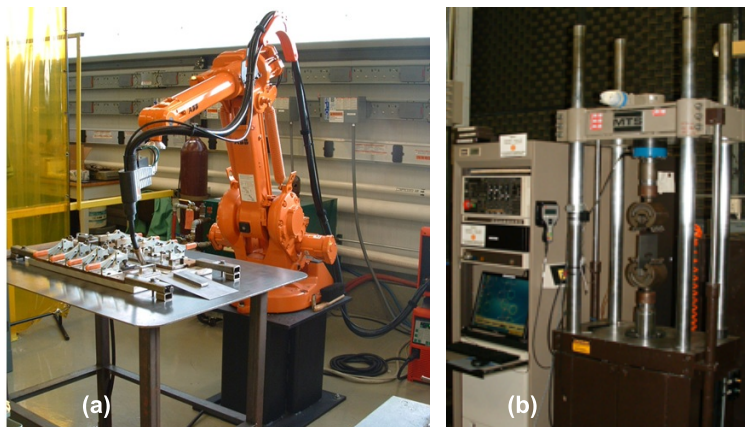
(a) Welding and (b) fatigue testing systems at ArcelorMittal.
